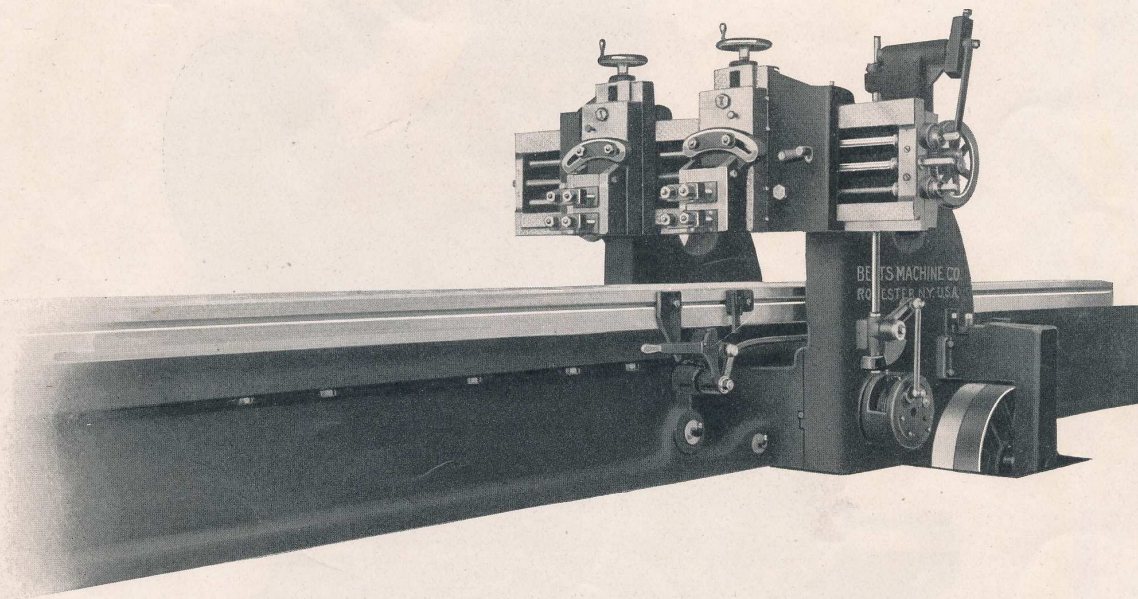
BETTS HEAVY DUTY FROG AND SWITCH PLANING MACHINE, TYPE A4200
